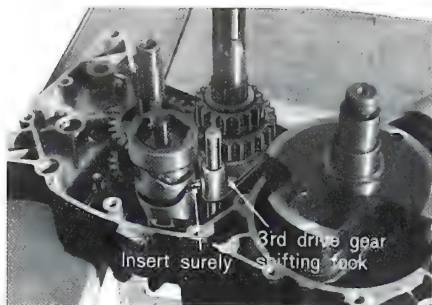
Inserting shifting fork into the third drive gear
